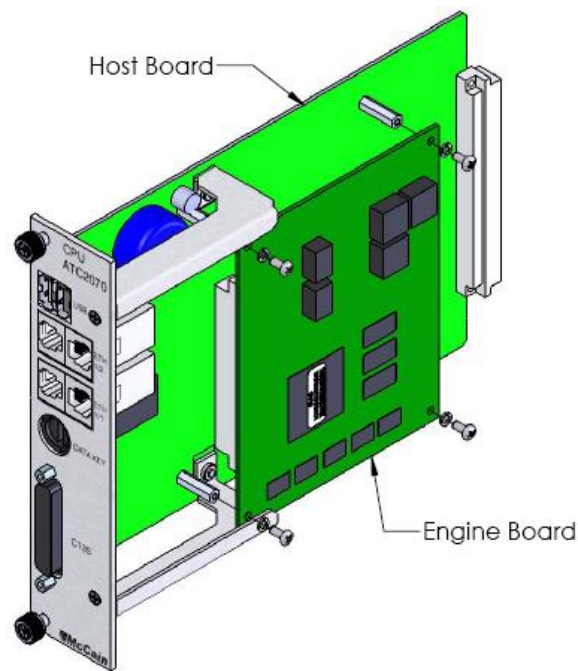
2070ATC CPU Module: Host Board and Engine Board
